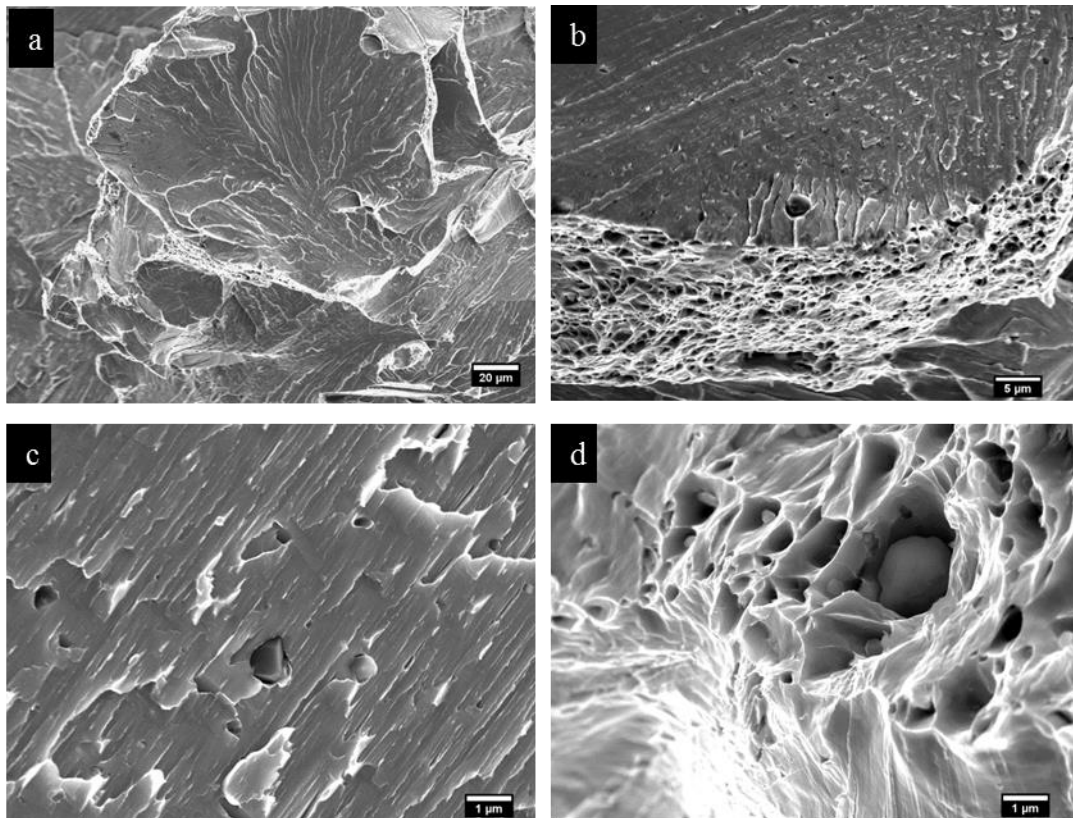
SEM fractographs of as received APMT showing a) brittle cleavage fracture region surrounded with ductile fracture regions, b) a higher magnification image of a region with both, brittle cleavage and ductile fracture modes, c) particles extruding from cleavage fracture area and d) particles embedded in dimple fracture microvoid regions
